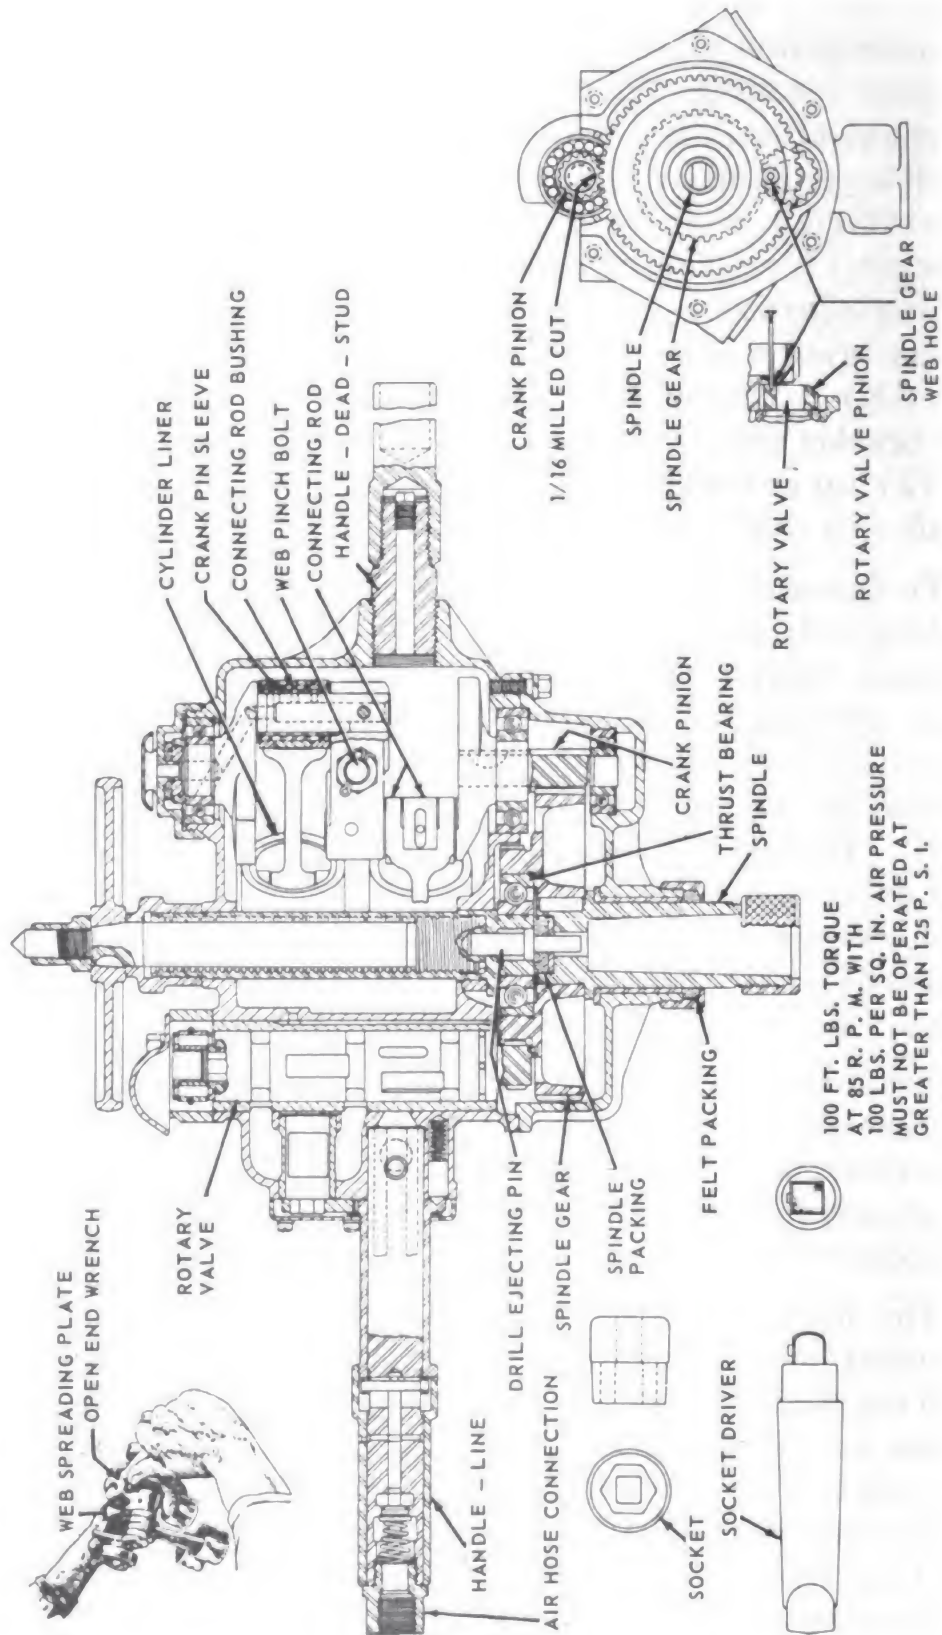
Air (motor) wrench and socket for barring the engine.
